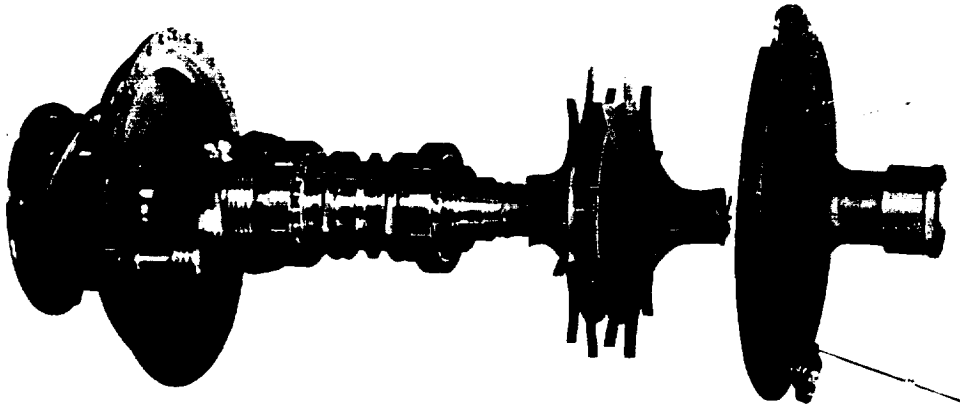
Pratt & Whitney's liquid-hydrogen pump for the model 304 jet engine. The seal between the rotor and bearings operated dry; the bearing lubrication was conventional. (Courtesy of Pratt & Whitney.)
